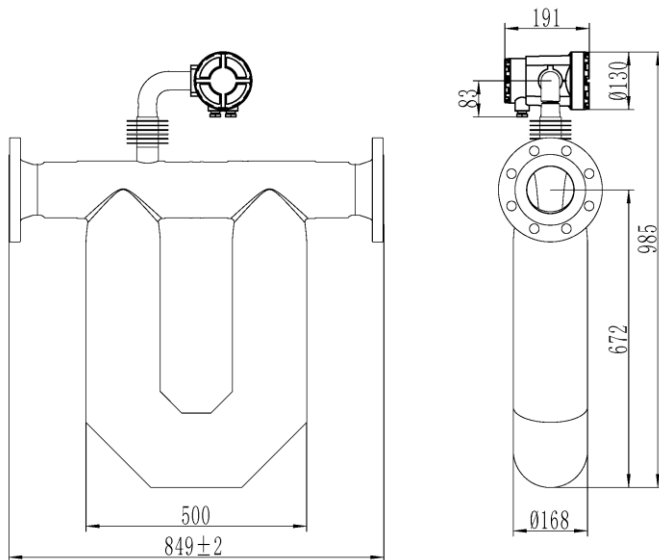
The overall dimensions of AMF080-TL4I (U tube)
